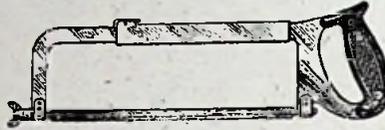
A comfortable and steady grip may be obtained with a handle of this type.
